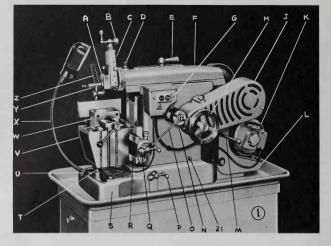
Principal parts of a shaper: (A) Clapper box, (B) Down-feed handle, (C) Head, (D) Headswivel lock screw, (E) Ram clamping handle, (F) Ram, (G) Switch box, (H) Hand wheel, (J) Drive-pulley guard, (K) Motor, (L) Motor cradle, (M) Tension release lever, (N) Eccentric, (O) Feed rod, (P) Table elevating crank, (D) Cross feed crank, (R) Cross-rail, (S) Base, (T) Work-table support, (U) Support locking handle, (V) Work-table, (W) Vise, (X) Lamp, (Y) Tool post, (Z) Tool holder. (South Bend Lathe)
